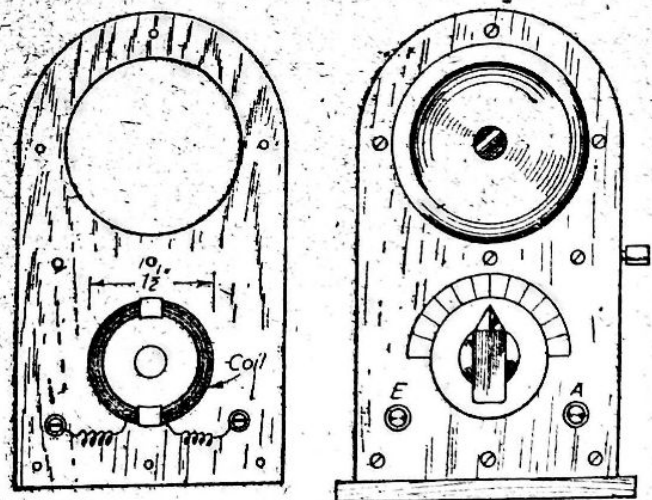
How the coil is connected, with front view of the set, showing smaller pointer knob and cardboard dial.
